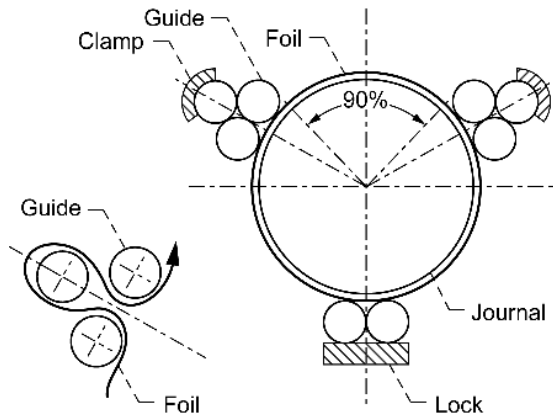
Earliest foil bearings were inspired by magnetic tape/roller geometry and were used to replace rigid sleeve bearings in Brayton Rotating Unit (BRU) demonstrator (Ref. 5).
